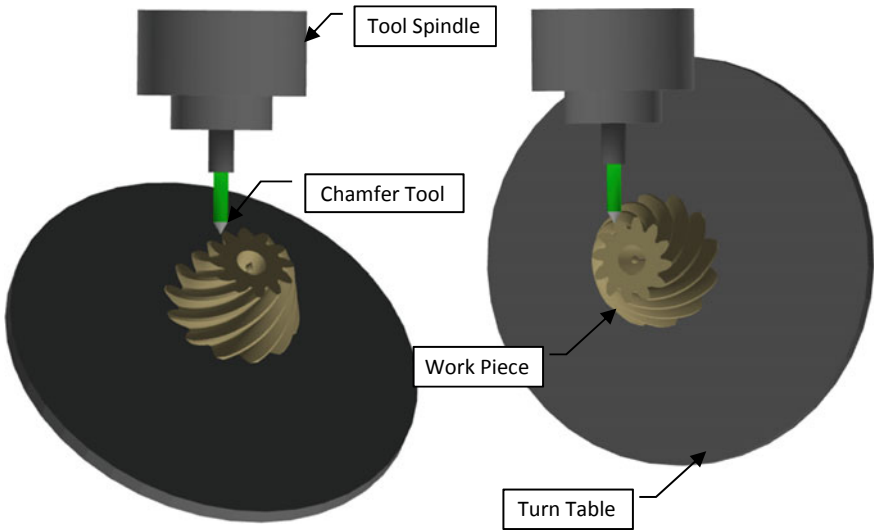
Pinion Tip chamfering with Chamfer Tool
